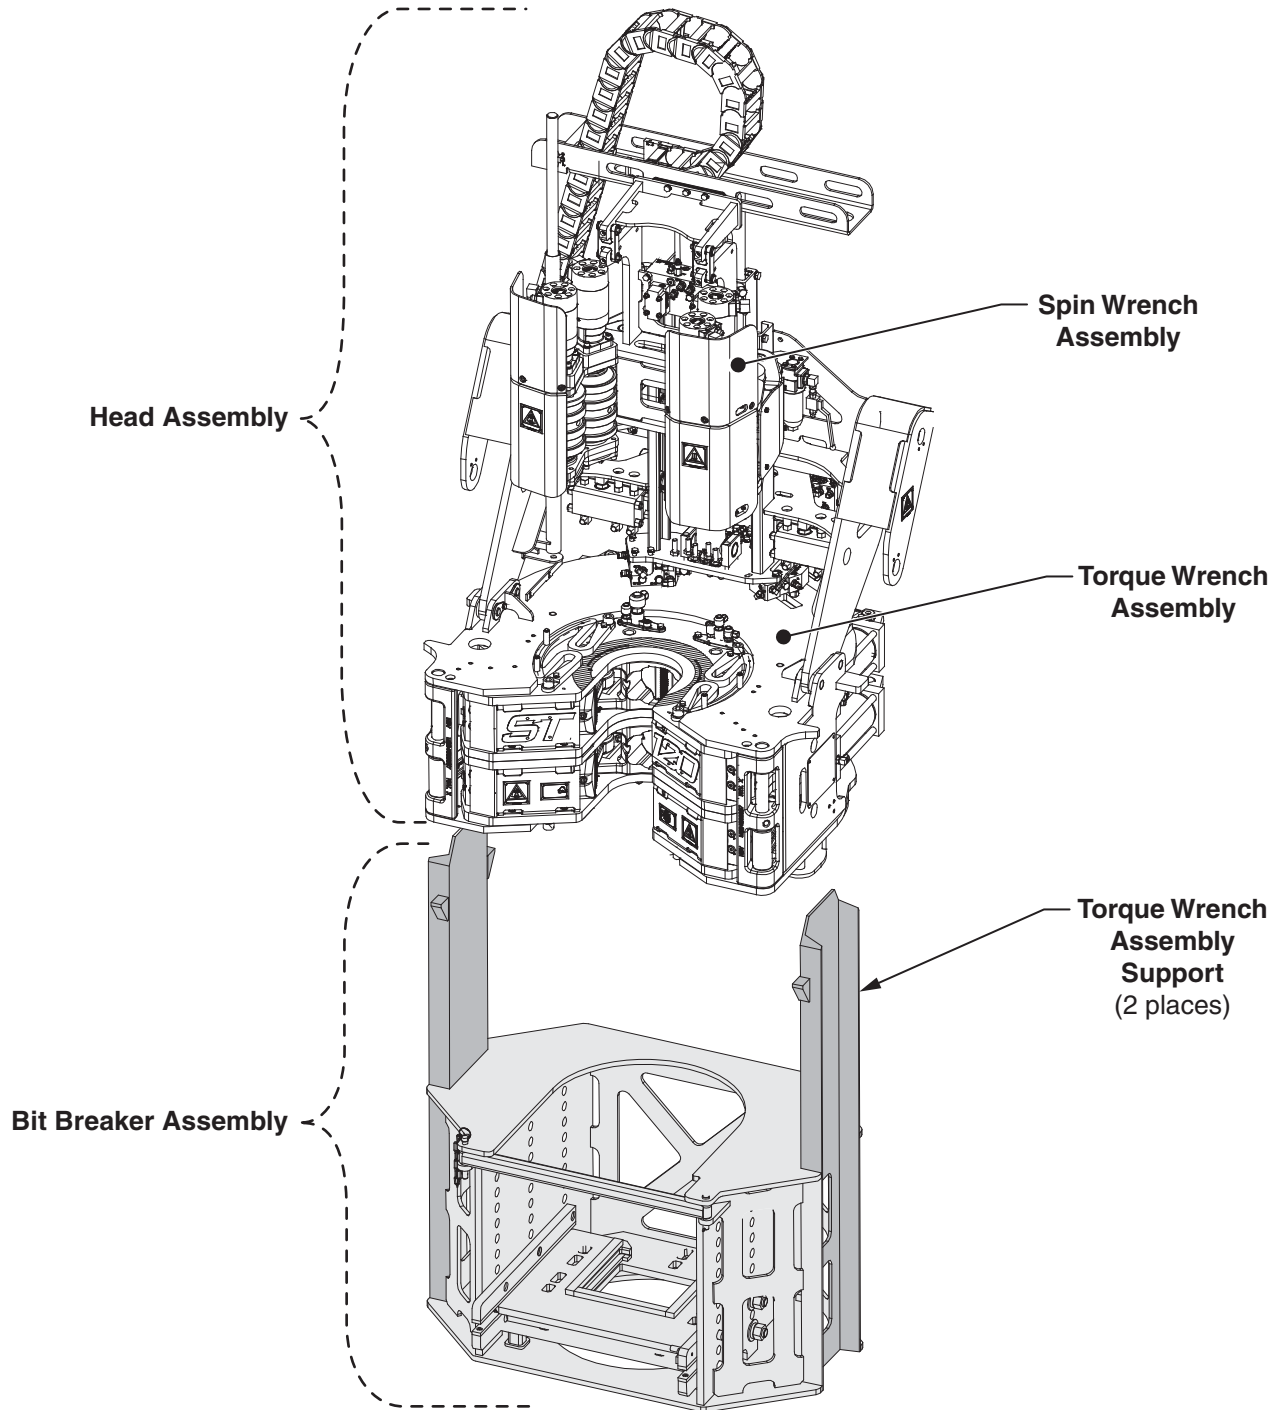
Torque Wrench Assembly Interface with Bit Breaker Assembly (1 of 2)
